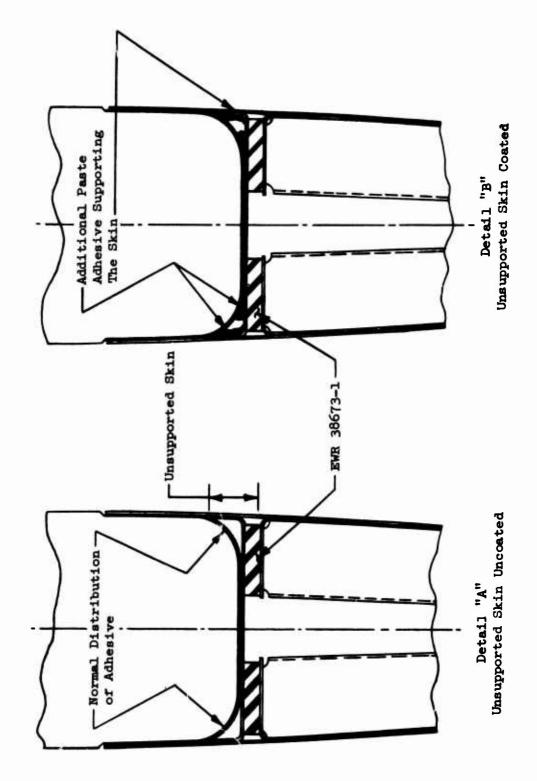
, Proof Load Test - Additional Paste Adhesive,
